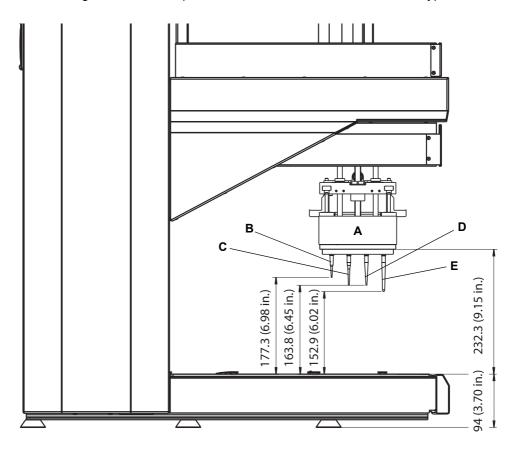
MCA384 pipetting head / MCA96 DiTi tip clearance
